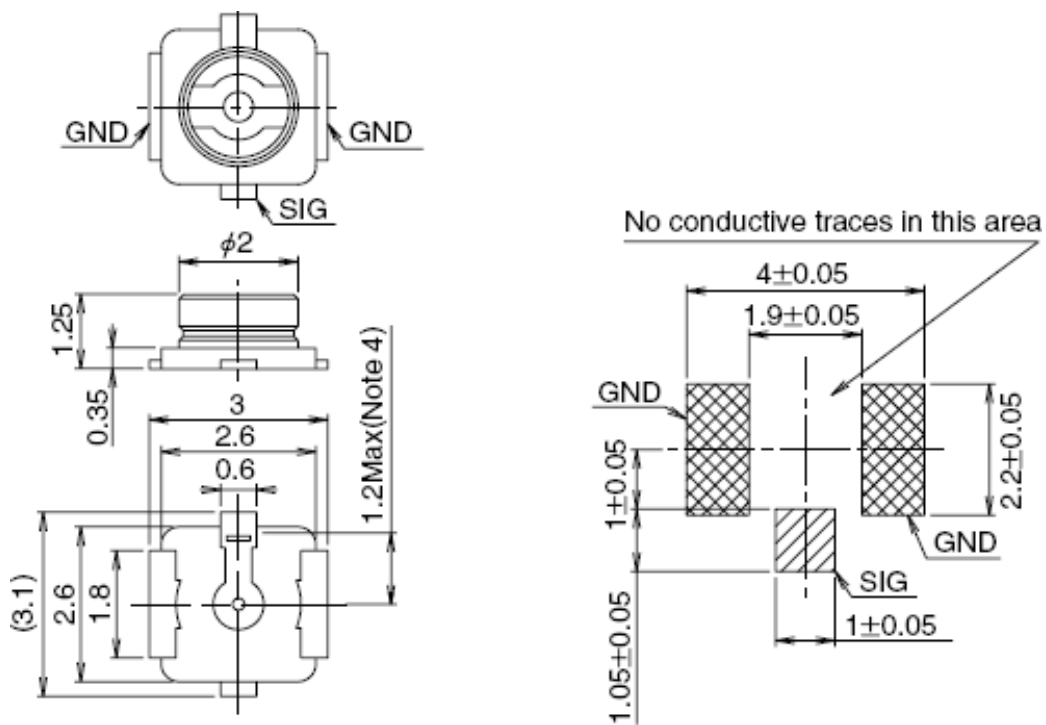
U.FL-R-SMT Connector Dimensions (mm)
